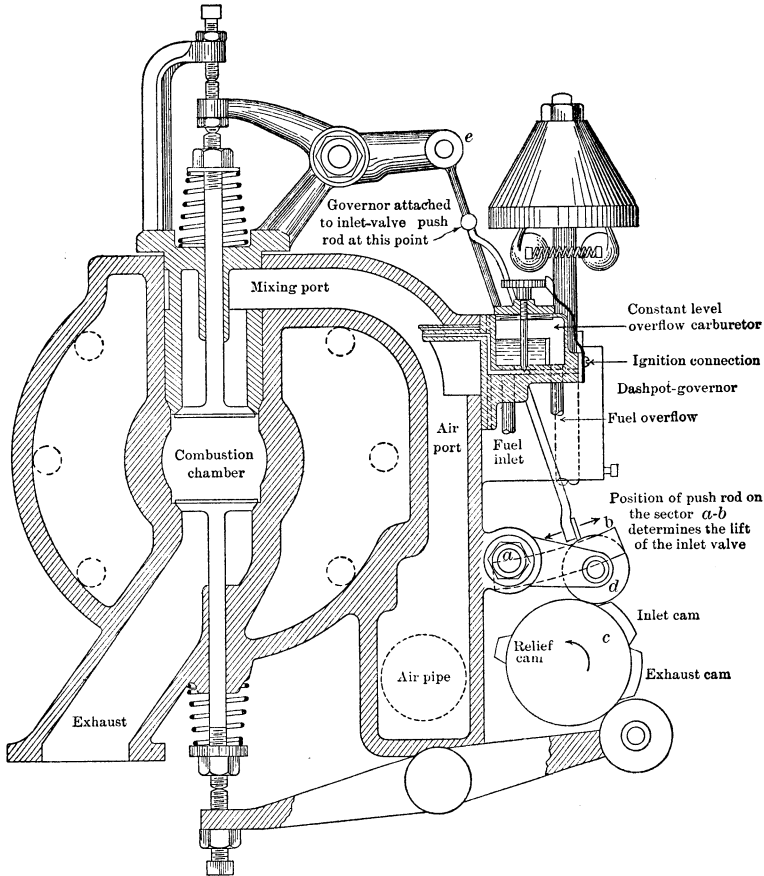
Vertical section through inlet and exhaust valves of Otto alcohol engine.
